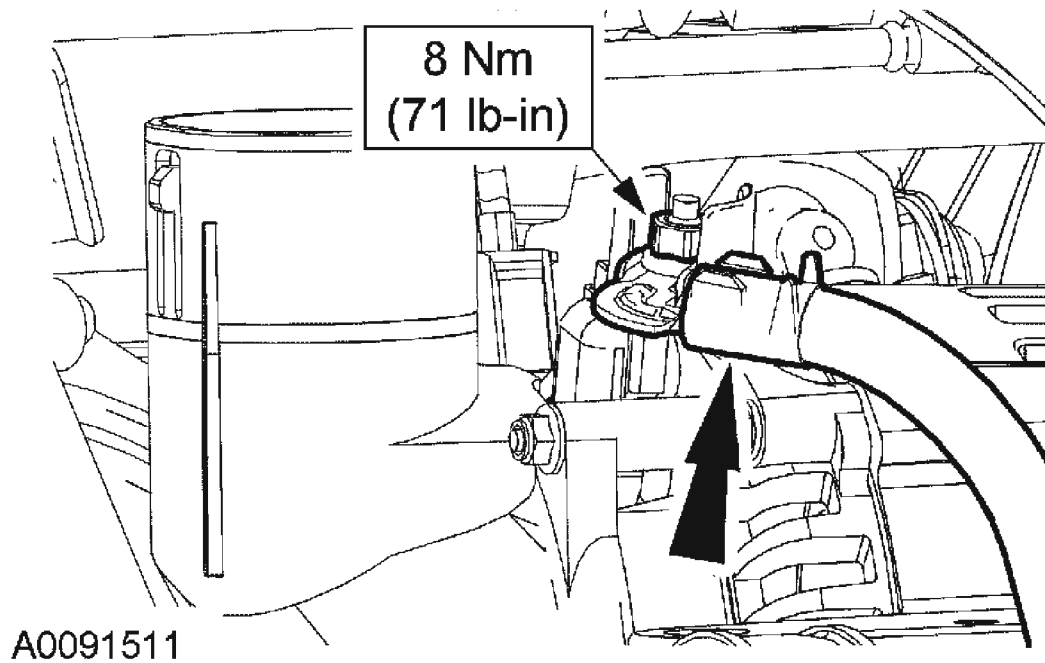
Removing Generator B+ Cable Nut And Disconnecting B+ Cable
